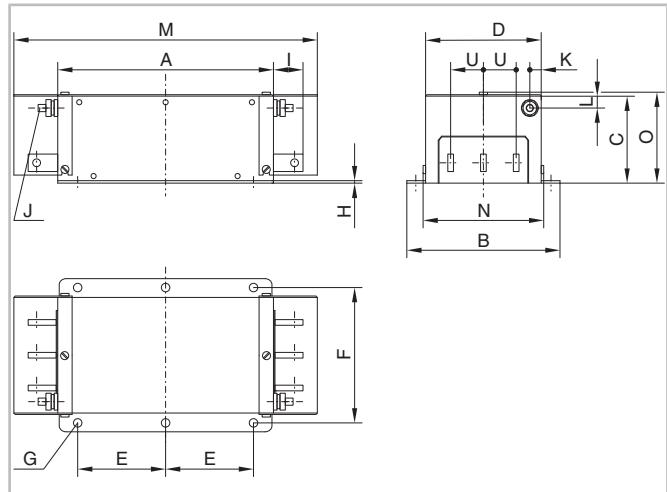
Dimensional drawing of RFI filters 3259-320-99 ..
